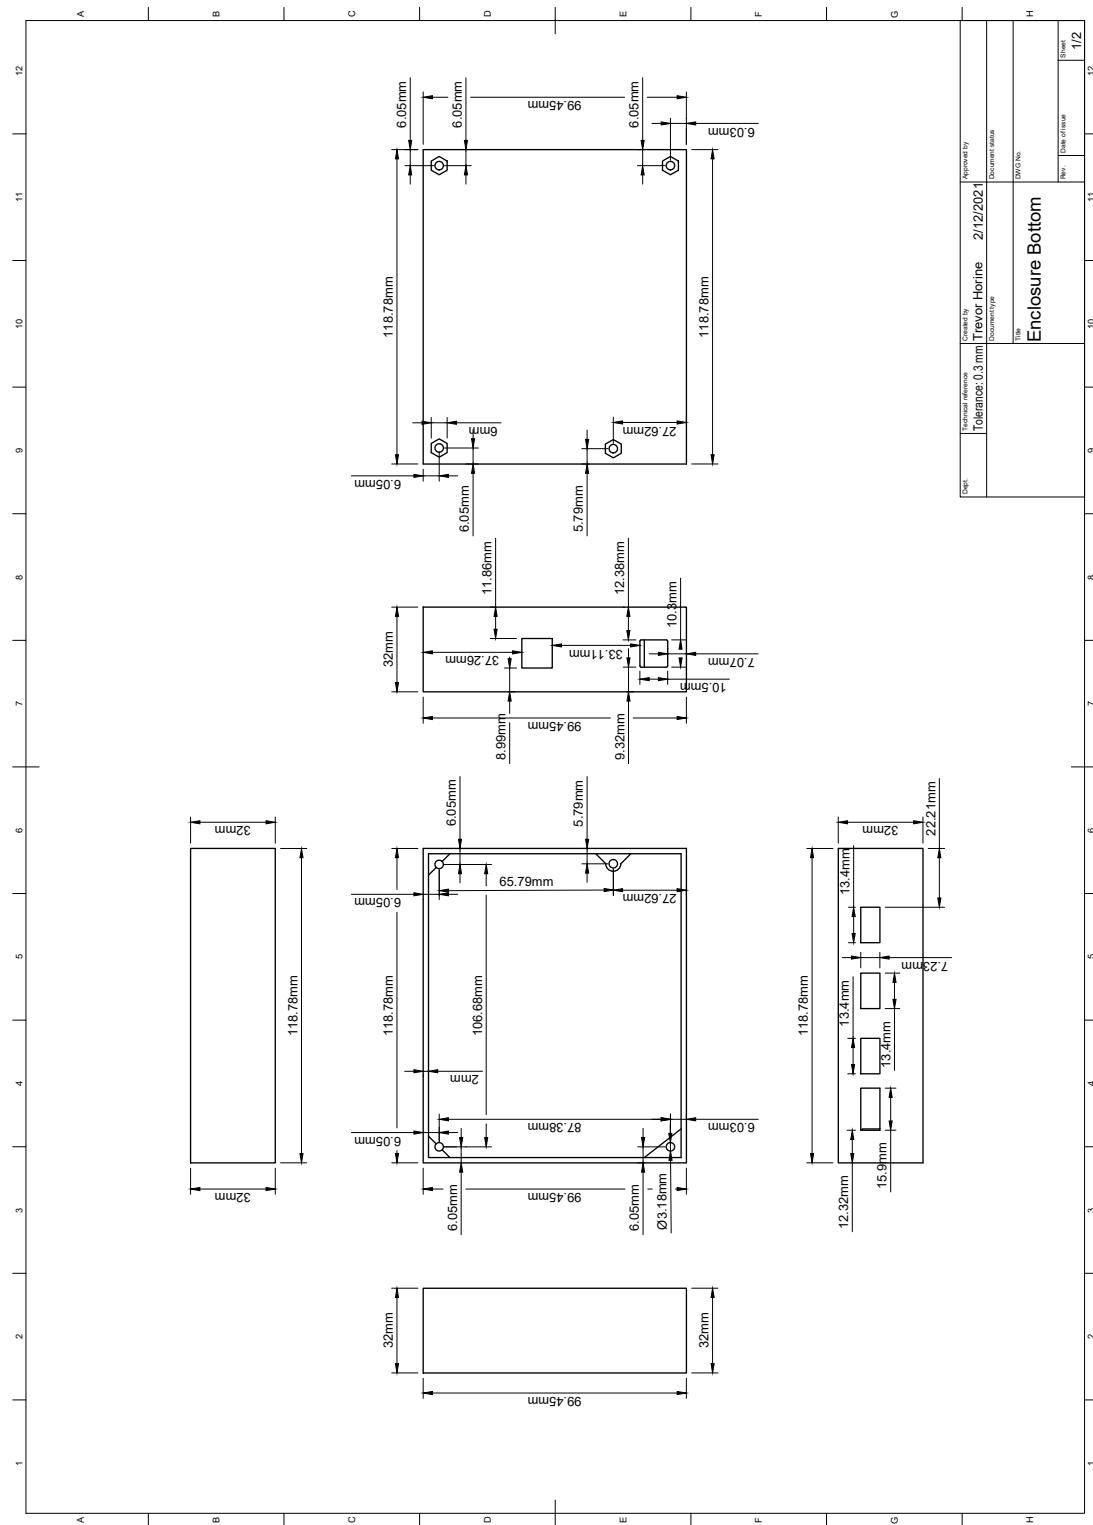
Mechanical drawing of the bottom half of the enclosure designed to hold the PCB.
